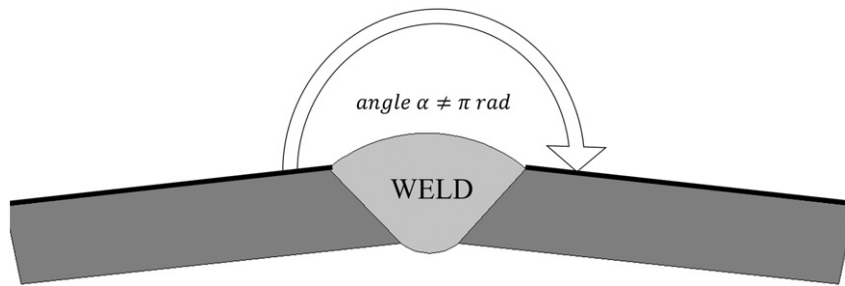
Misalignment in a weld appears when the desired angle α between the surfaces of the welded plaques does not match with the real angle.
